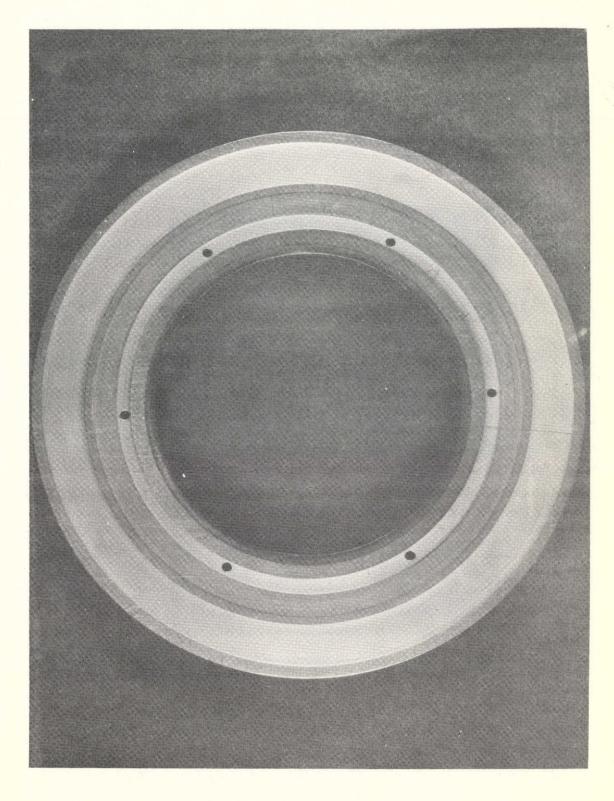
Cracked Oil Dam and Heat Shield, Seat Side.
